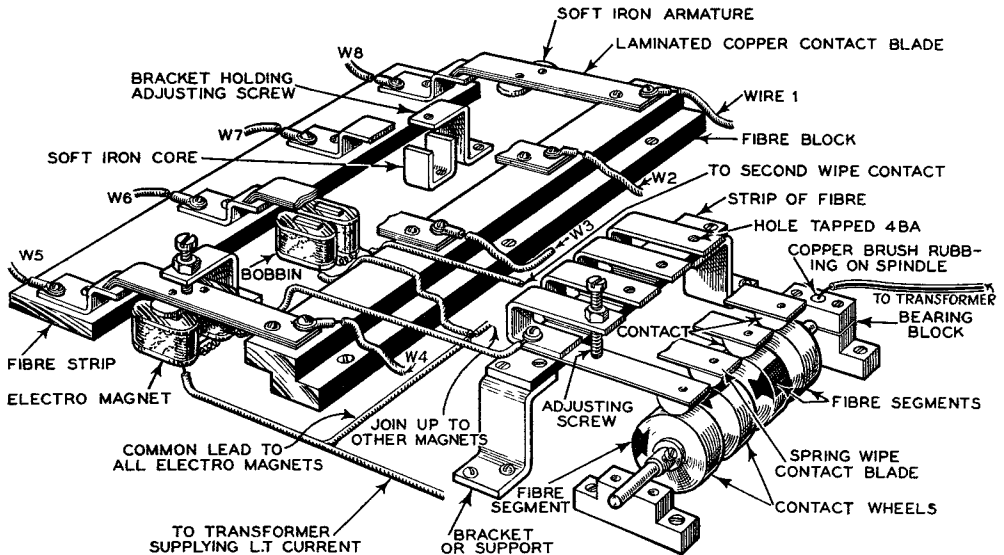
PICTORIAL VIEW OF ELECTRO-MAGNETIC FLASHING SWITCH. The whole apparatus is to be mounted on a baseboard
